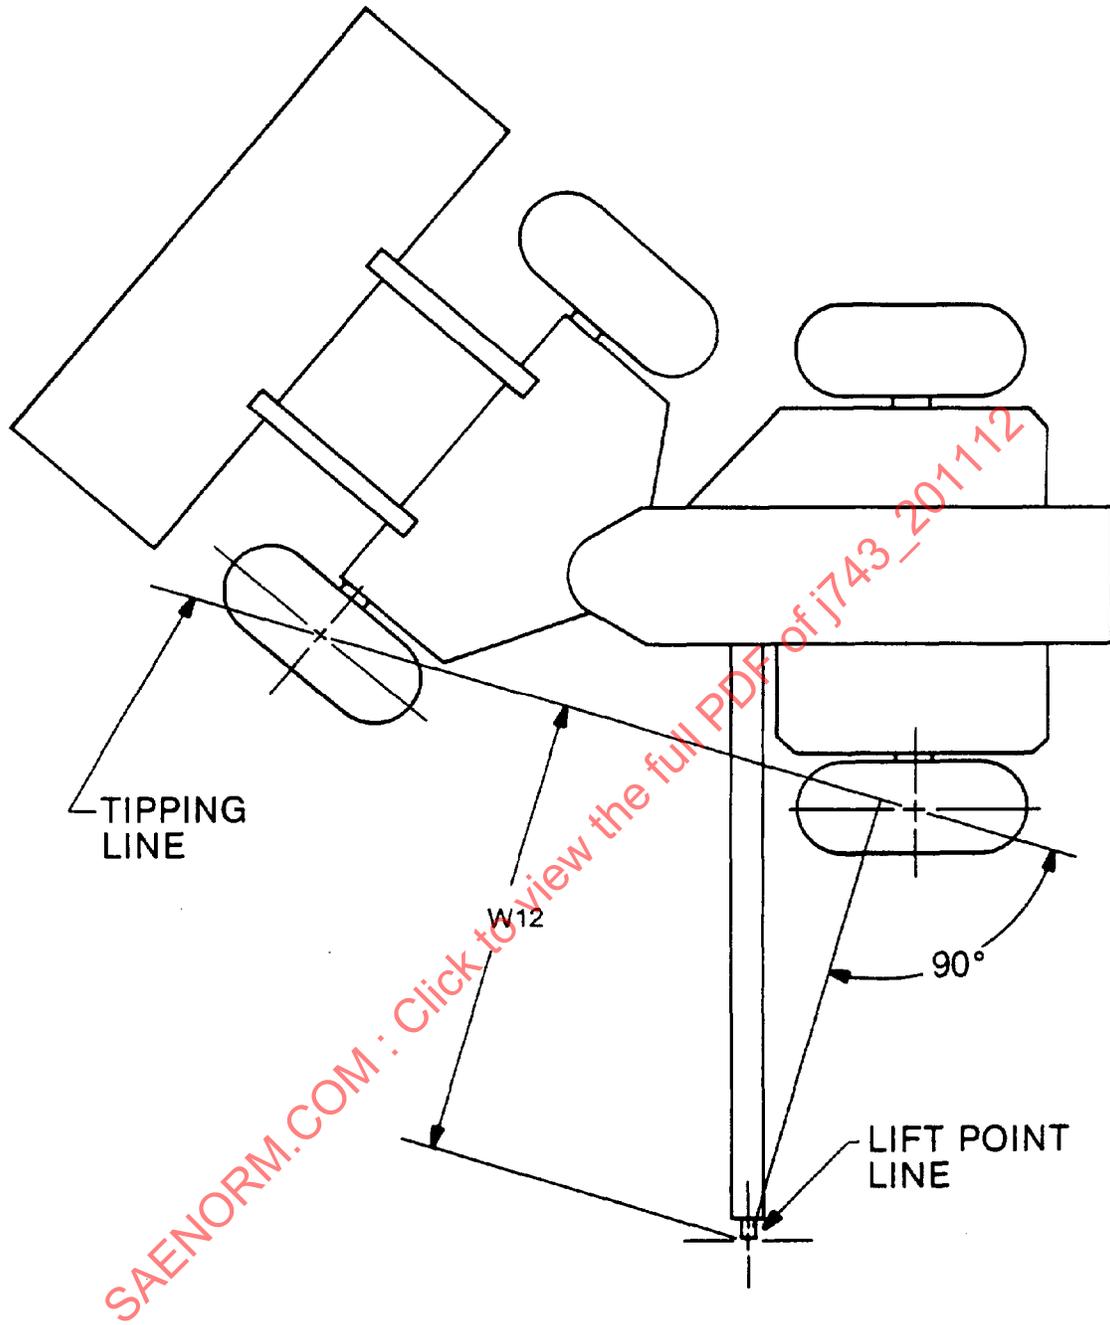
ARTICULATED WHEEL MACHINE STEERED RIGHT NON-OSCILLATING AXLE
